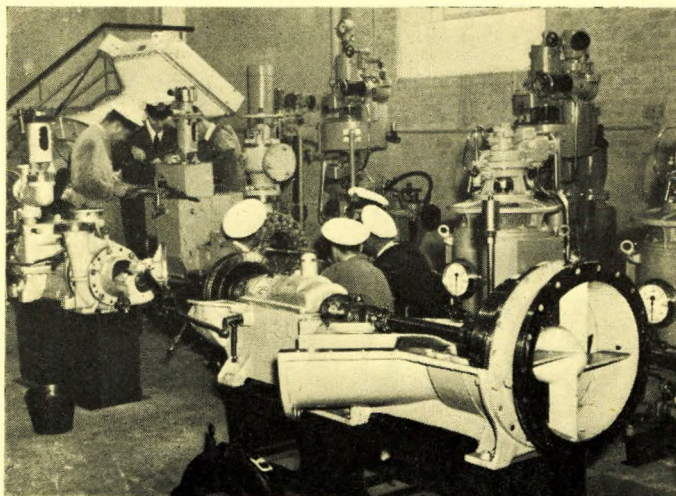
AUXILIARY MACHINERY STRIPPING BAY. EXAMINATION OF TURBO FEED PUMP
